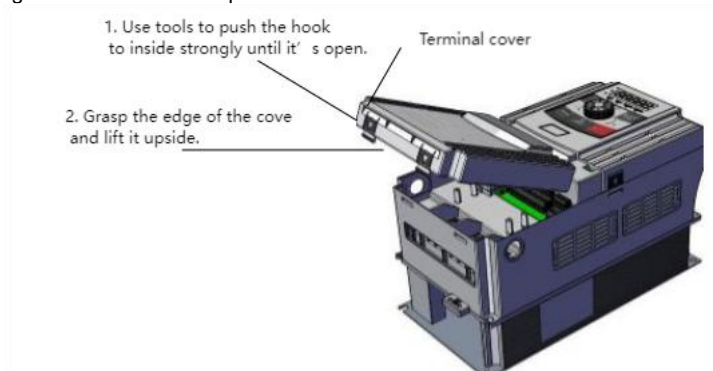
Disassembly diagram of plastic shell terminal cover
